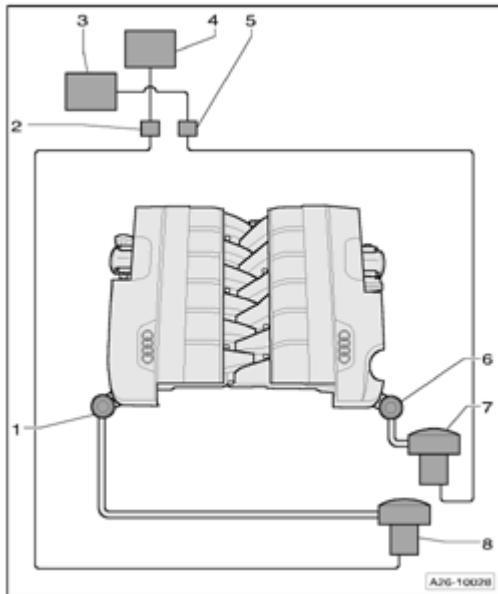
Secondary Air Injection (Air), Assembly Overview
